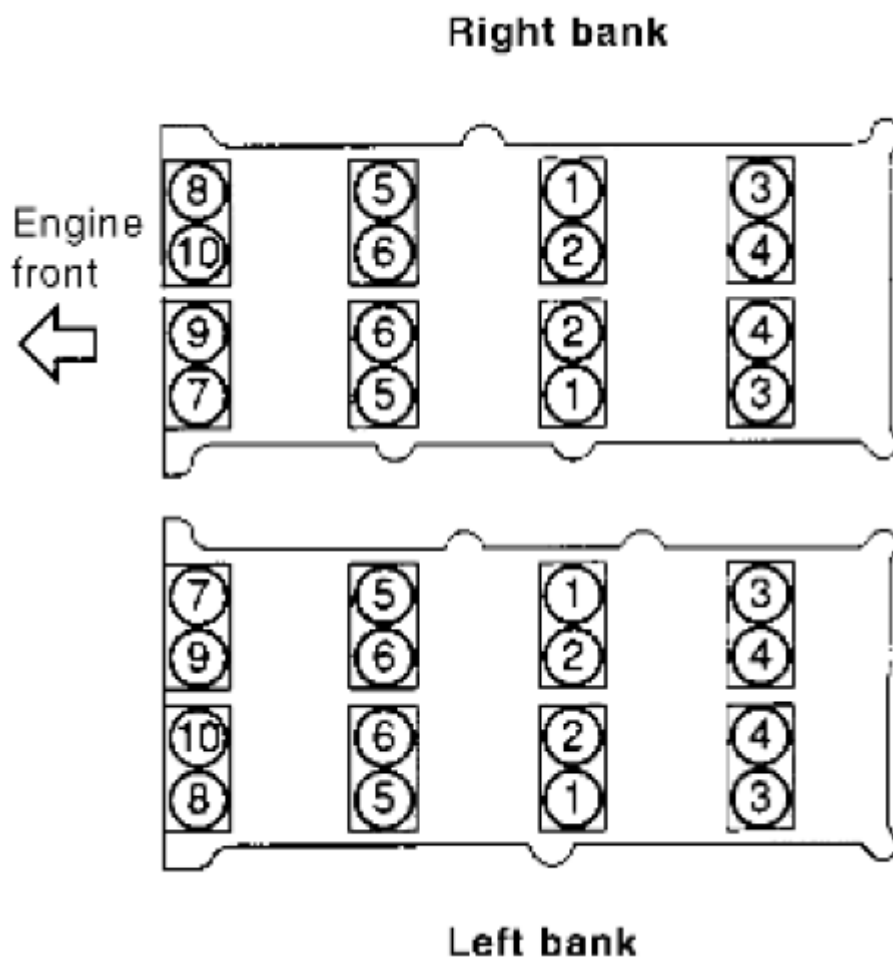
Identifying Camshaft Bracket Bolts Loosen Sequence
